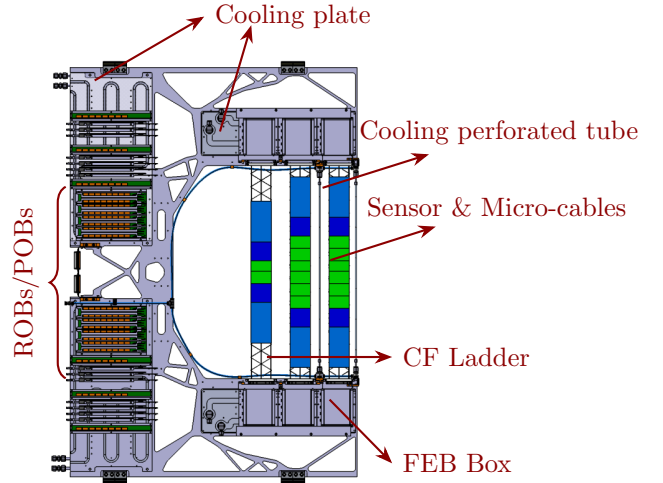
CAD geometry of aluminium-made C-shaped support frame along with different active and passive components.
